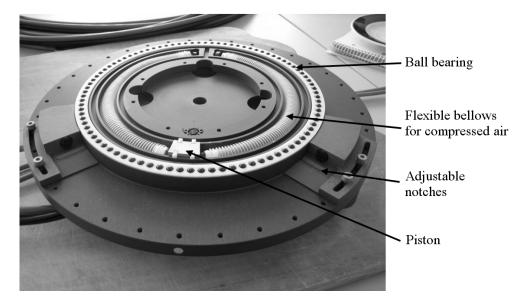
Steady part of the turn table. The piston is moved by switching compressed air alternating into the left or right tube. The rotatable part is pushed by the piston into its end positions defined by the notches.
